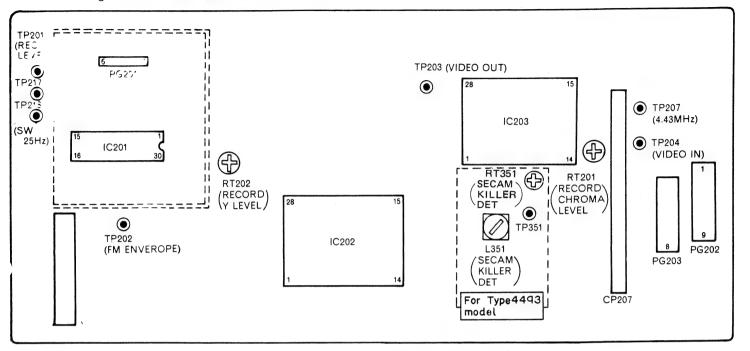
Y/Chroma P.C. Board (Parts Side)
